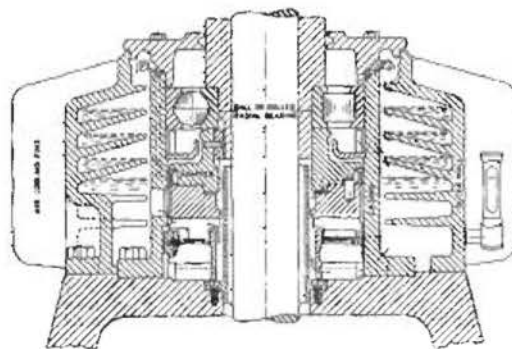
Kingsbury Thrust Bearing combined with ball or roller radial bearing. Special air-cooled mounting.
